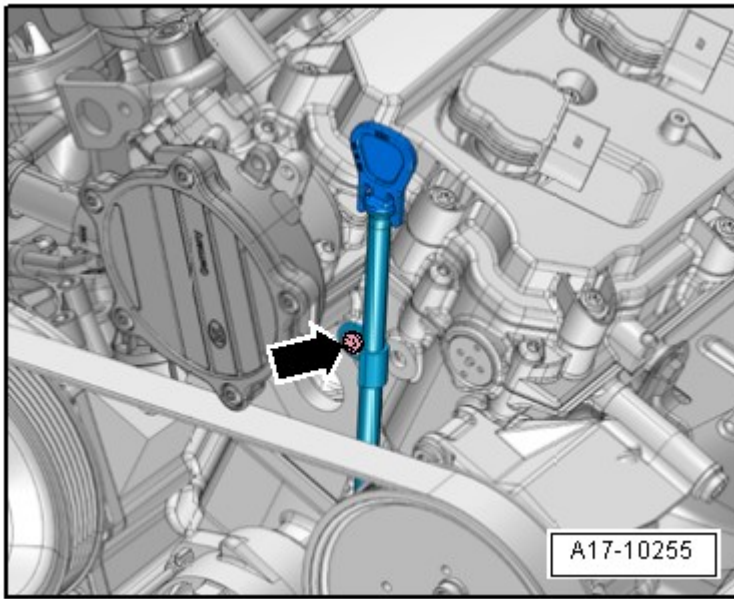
Identifying Oil Dipstick Guide Tube Bolt
